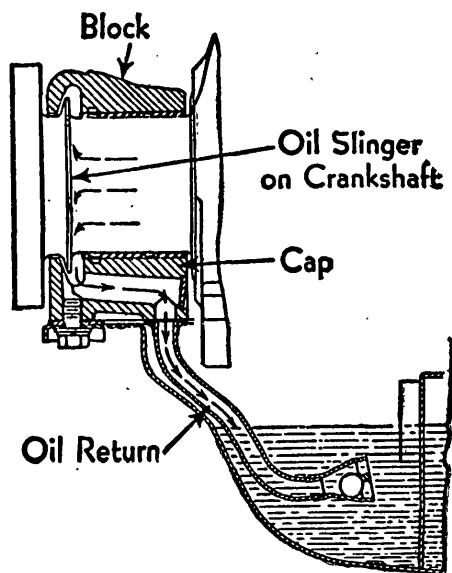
Rear main bearing oil slinger and drain. All 1936-38 models and 1939-49 Eights
